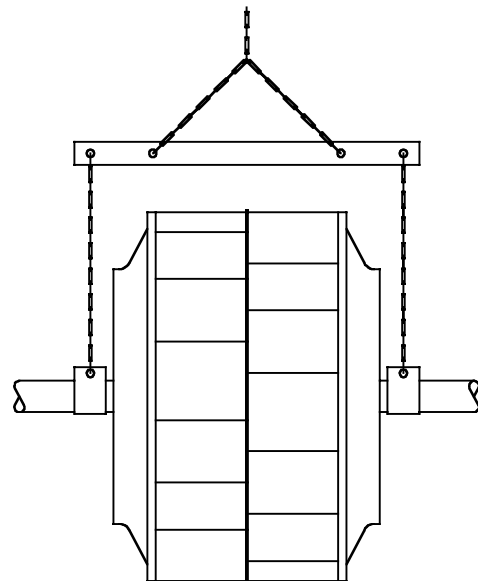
Correct use of spreader bar when lifting centrifugal rotor assembly
